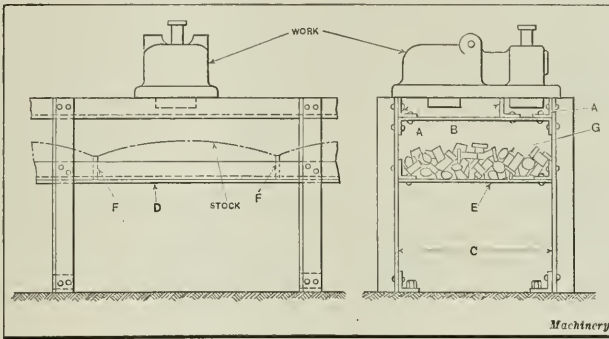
Plain Assembling Conveyor having Compartments for the Stowing of Parts
